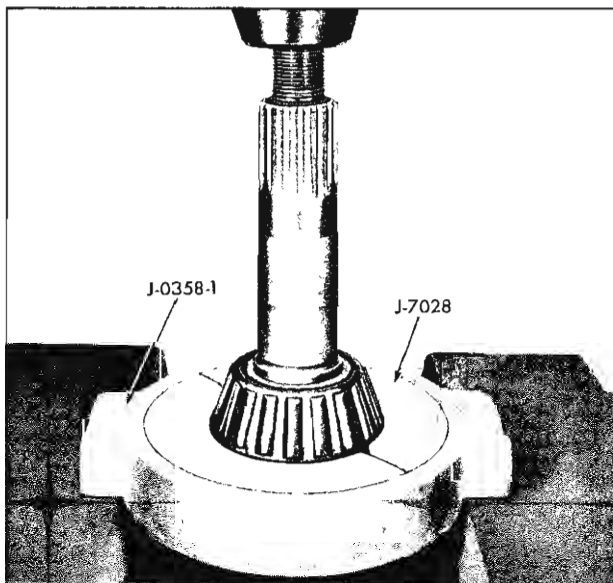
Removing Rear Pinion Bearing Cone and Roller
